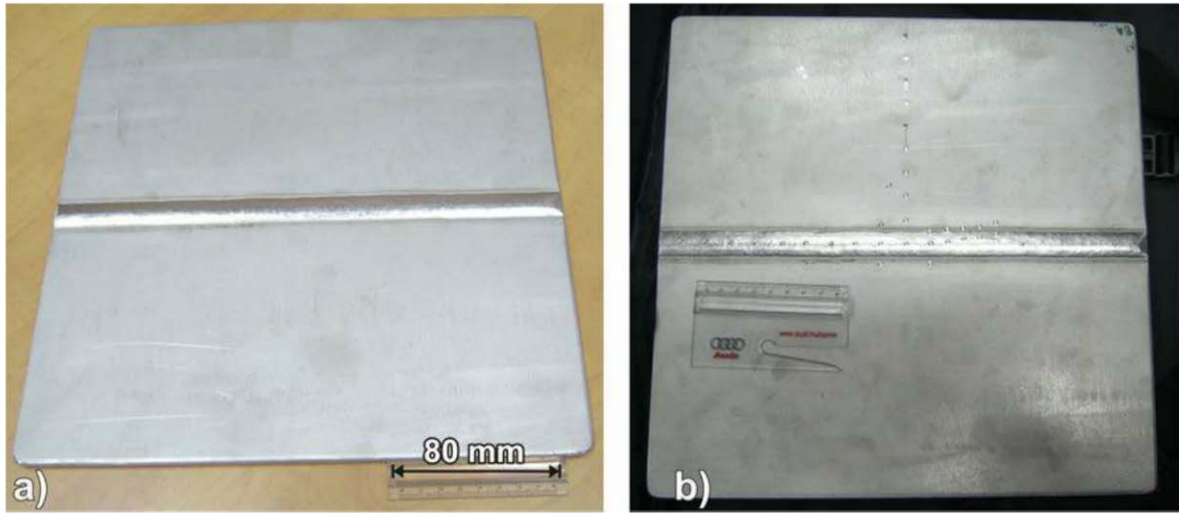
MIG-welded 5 mm thick welded plate before (a) and after (b) the holographic residual stress measurement
